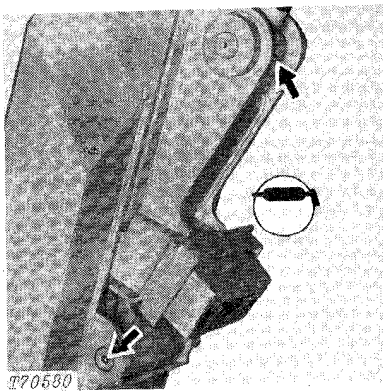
Secondary Boom Cylinder Rod End and Tilt Linkage (2 Points)
